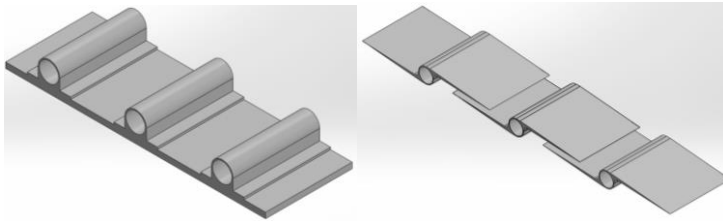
Thermal Shrouds - D-tube on Sheet & Bat wing
